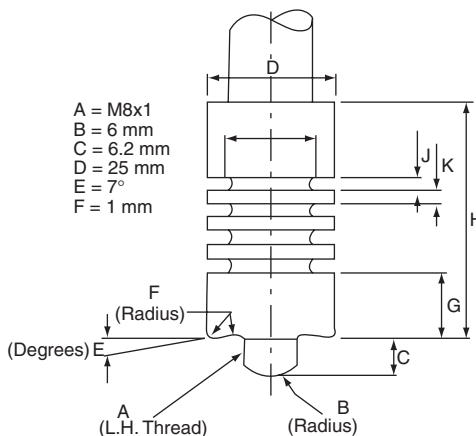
Original tool design used by The Welding Institute to develop the friction stir welding process. Source: Ref 33
